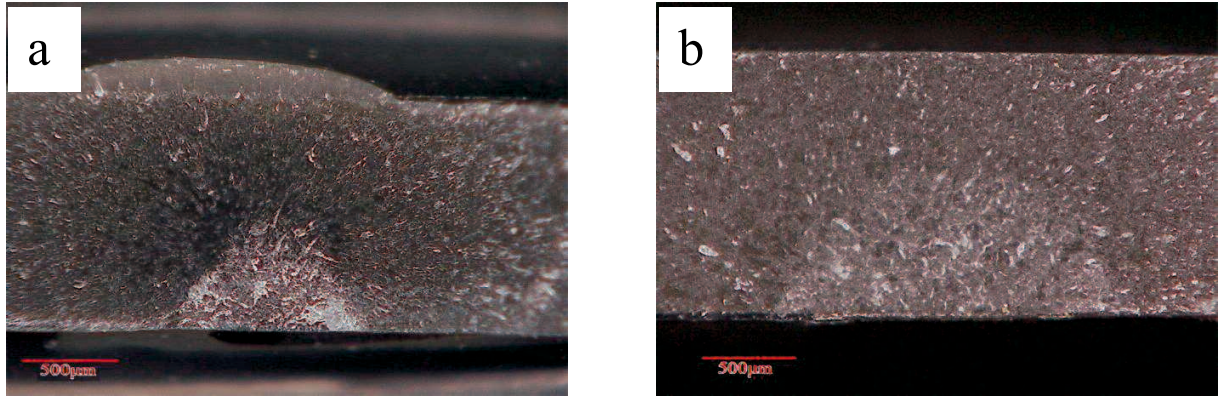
Typical fatigue fracture surface of (a) 1phr and (b) 3phr specimens.
